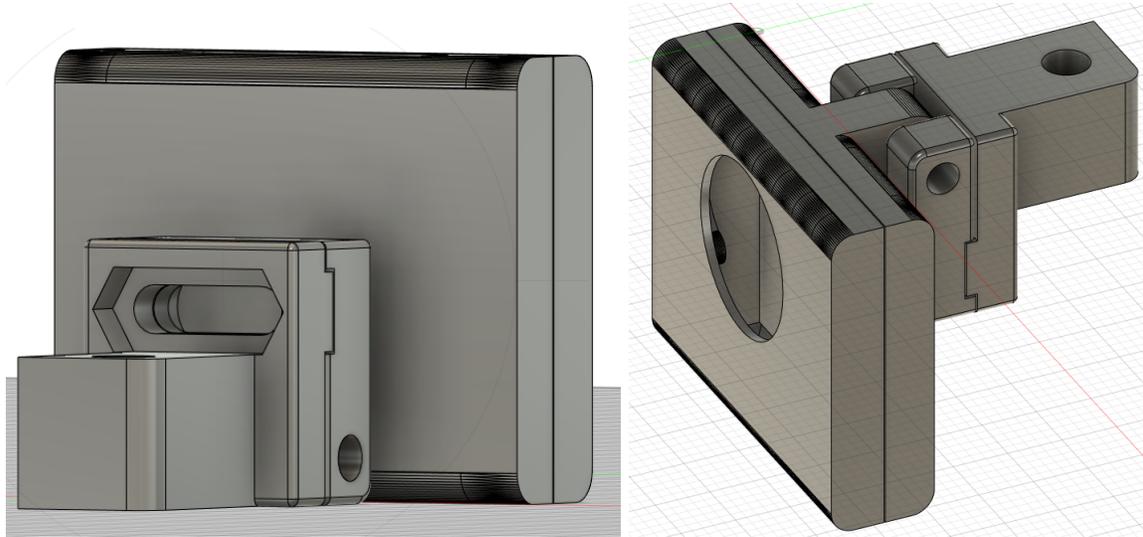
Camera Case and Mount Rear (Left) and Front (Right) [57]
